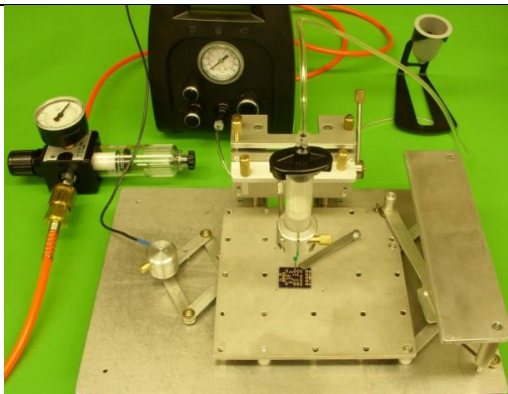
Dispenser on Manipulator (with ext. 6 bar)
